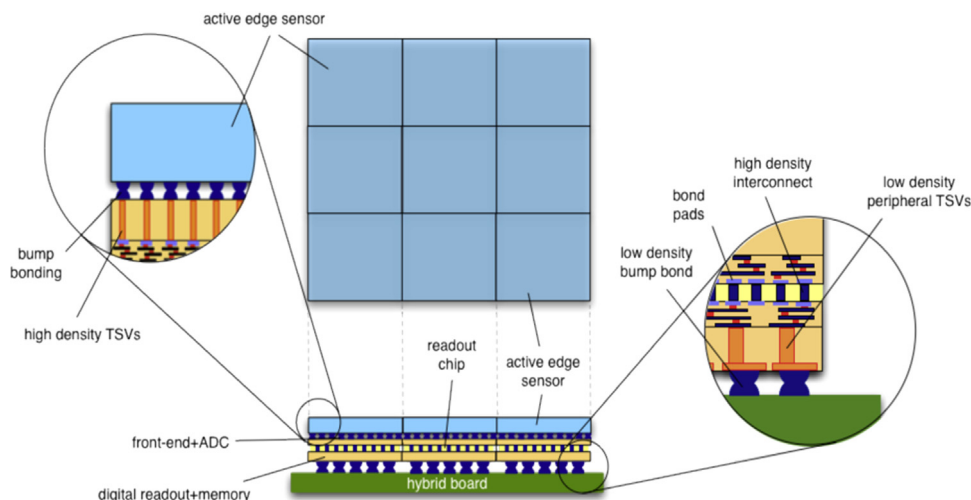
Conceptual layout of the PixFEL matrix assembled with four-side butttable modules composed of a multilayer device built with sensor, a dual-tier front-end chip and a hybrid board, interconnected with vertical interconnection.
